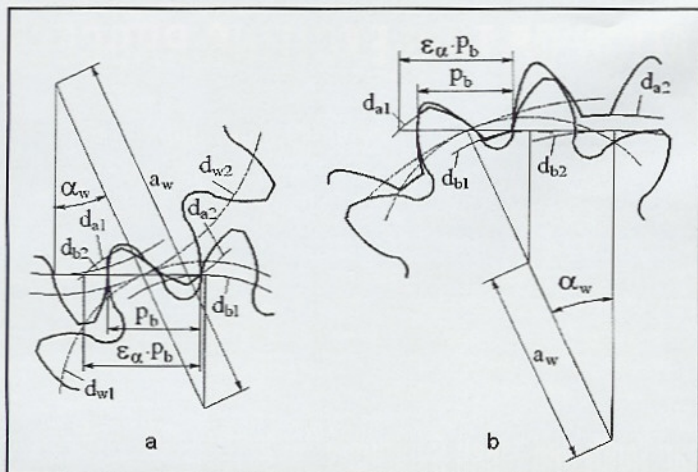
GEAR MESH; a—EXTERNAL GEARING; b—INTERNAL GEARING; a_w —CENTER DISTANCE; P_b —BASE CIRCLE PITCH; α_w —OPERATING PRESSURE ANGLE; ϵ_α —CONTACT RATIO; $d_{w1,2}$ —OPERATING PITCH CIRCLE DIAMETERS; SUBSCRIPTS “1” AND “2” ARE FOR THE MATING PINION AND THE GEAR.
